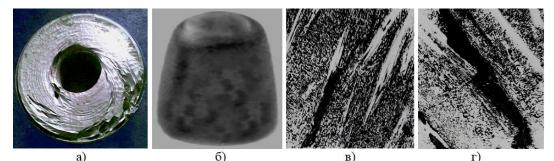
Cast worn parts and macrostructures cast from high-chromium white cast iron: a-pump impeller; b-clippers of drum mills; c, g-cracked specimens.
